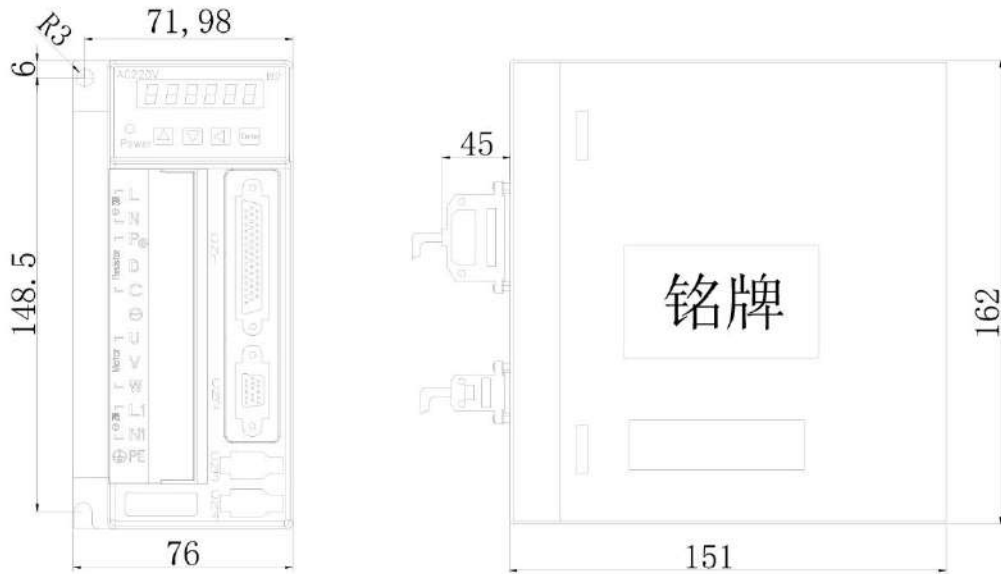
Front figure of DZ-15B2 series installation dimension
